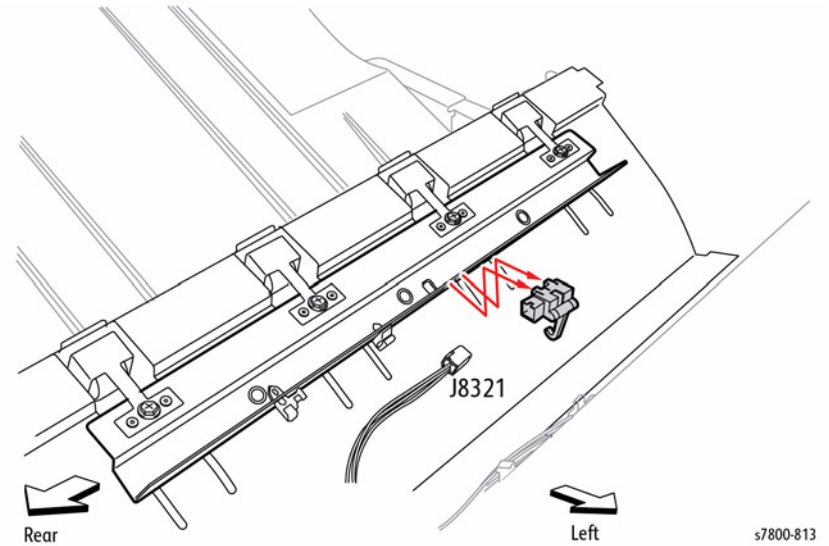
Removing the Stacker Upper Tray Exit Sensor
